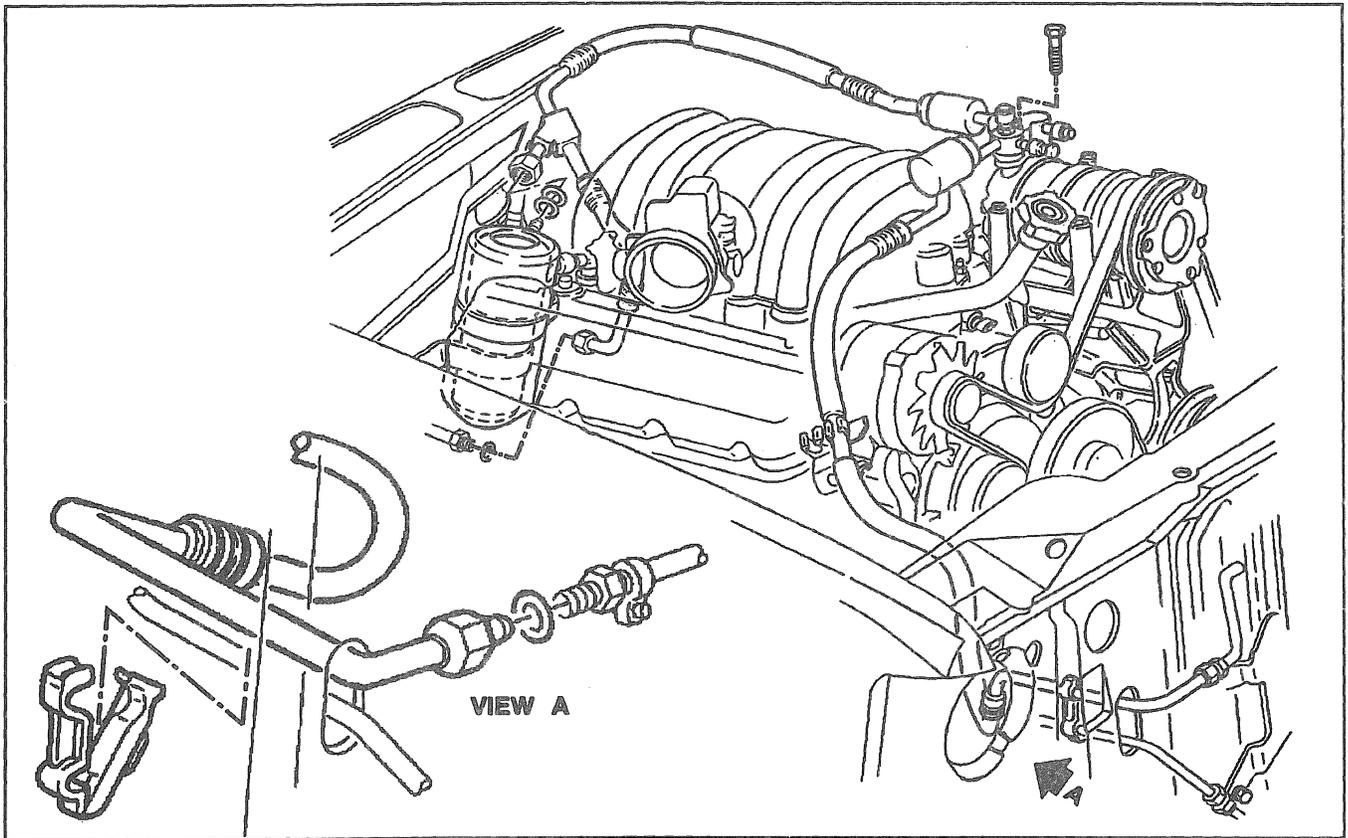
Compressor and Condenser Hose Assembly (7.4L Engines w/Aux. A/C)
